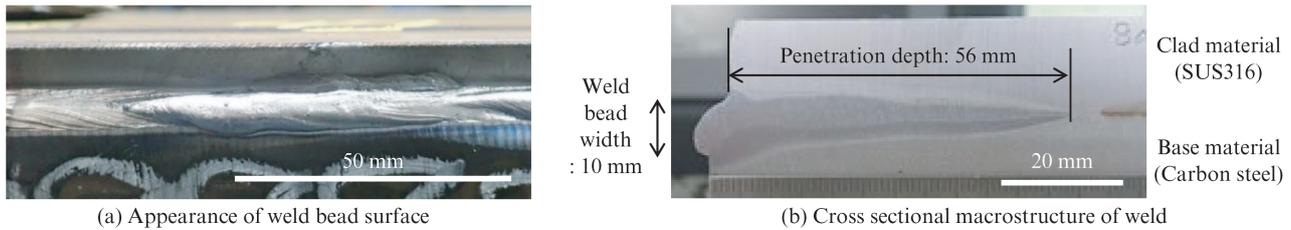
Examples of weld bead appearance and cross sectional macrostructure of vacuum laser weld in clad slab assembly (Laser power: 30 kW, Welding speed: 0.5 m/min)
